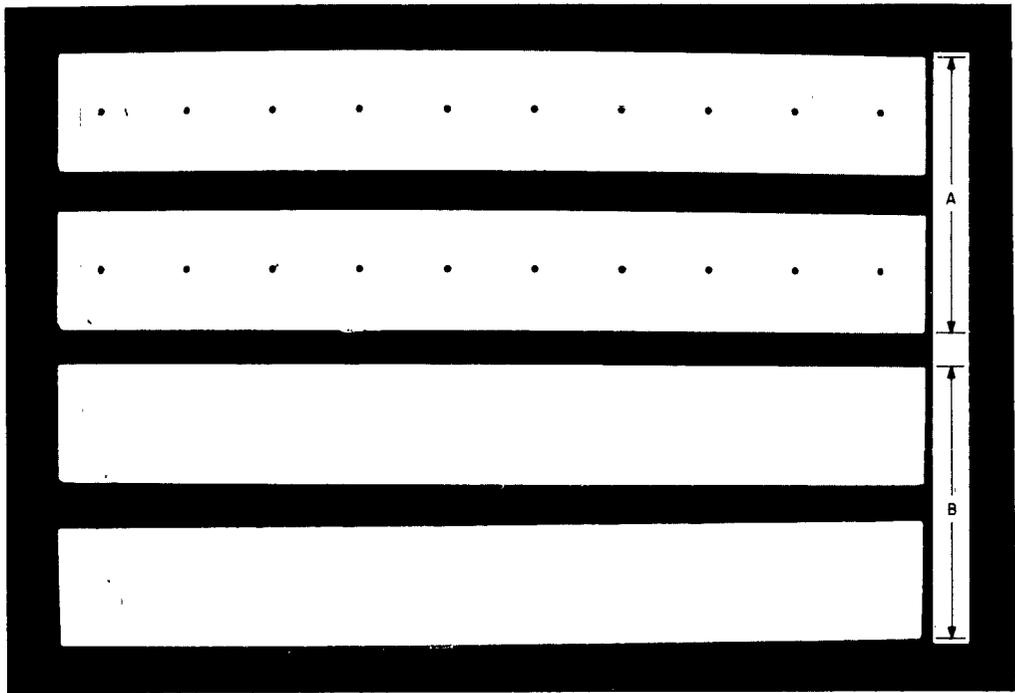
Work Holders (A, Printing Type; B, Inspection Type)
